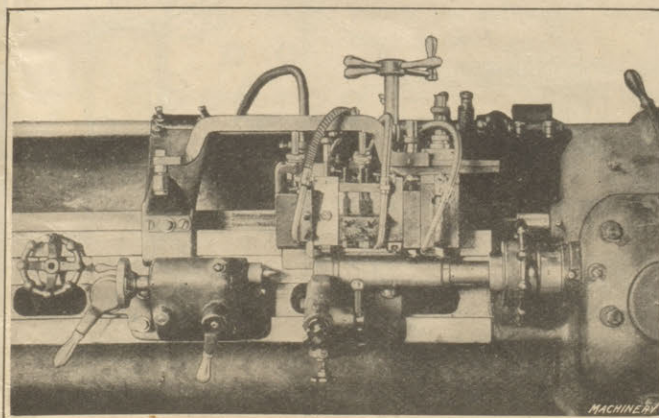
Set-up for performing First Series of Operations on Russian Forged Shell on "Lo-Swing" Lathe
